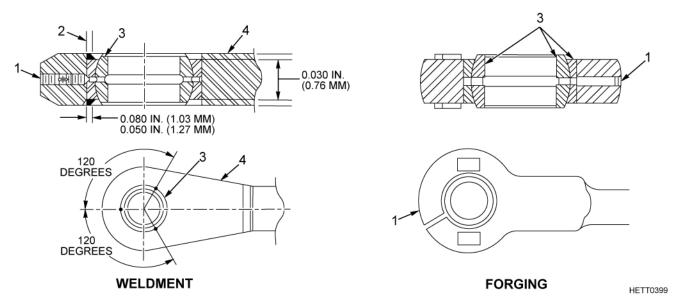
Installation of Plain Bearing on End of Longitudinal Strut.
